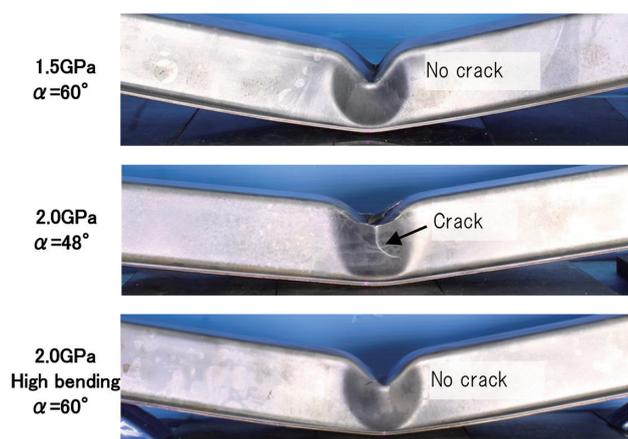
Appearance after 3-point bend test in hat shape parts (1.6 mm)
